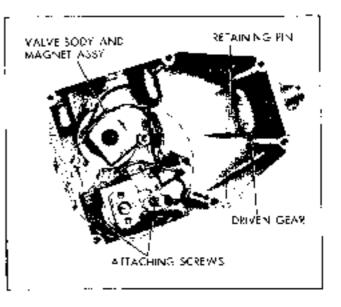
Valve Bridy and Magnet Assy. -Ramo all
